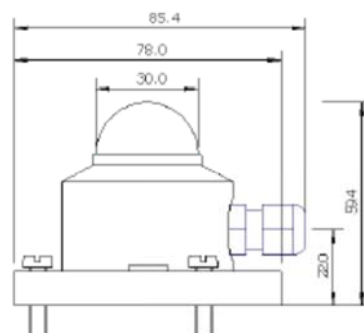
LP02 dimensions in mm. Standard cable length is 5 m. Cable can be installed / replaced by the user.
